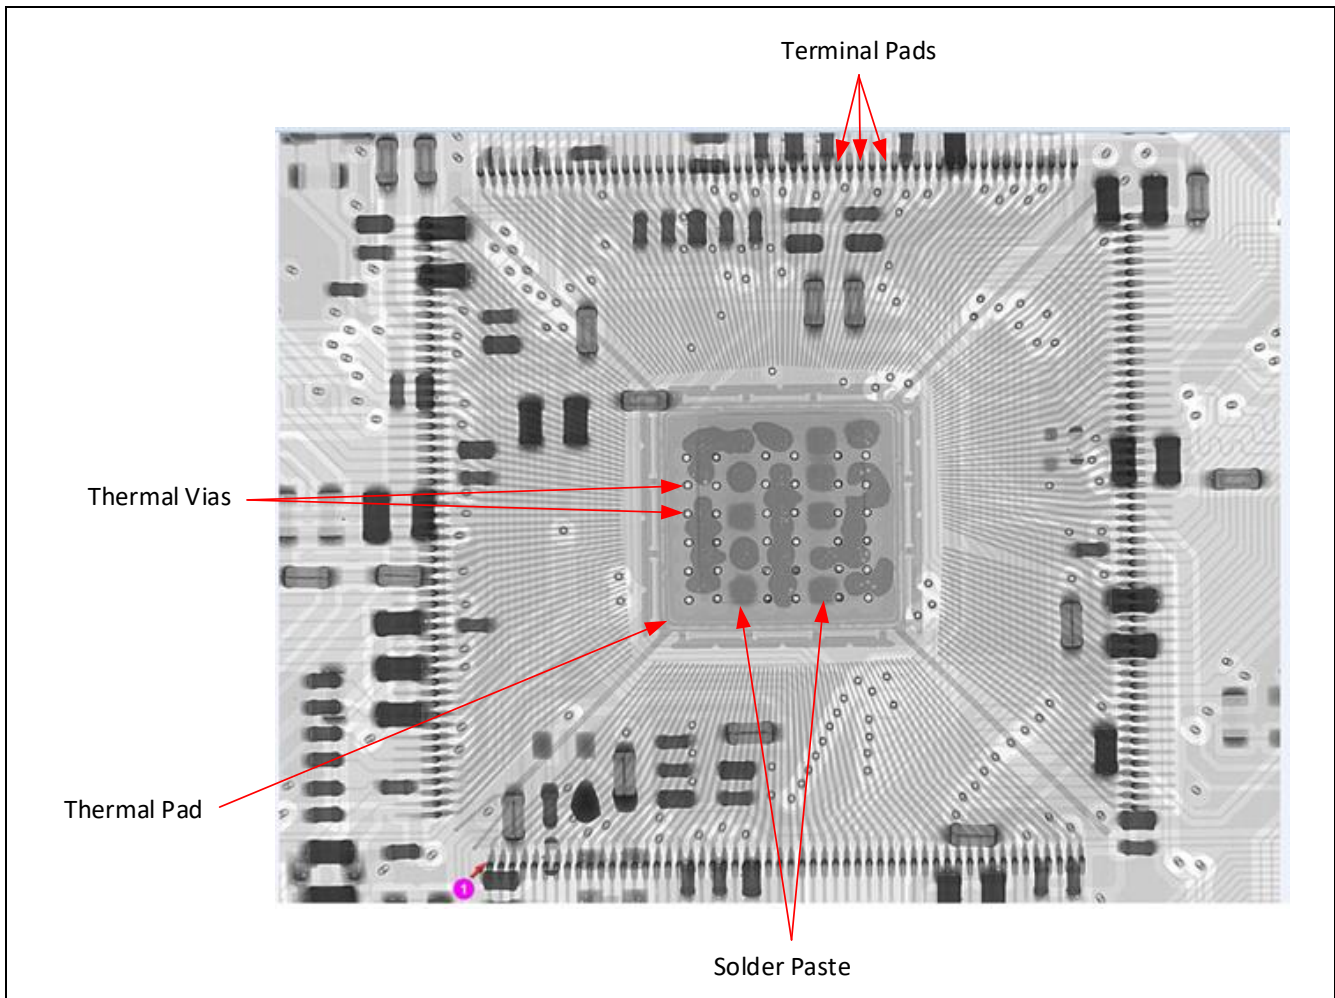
X-ray Picture of LQFP-EP 216-Pin Mounted on PCB
